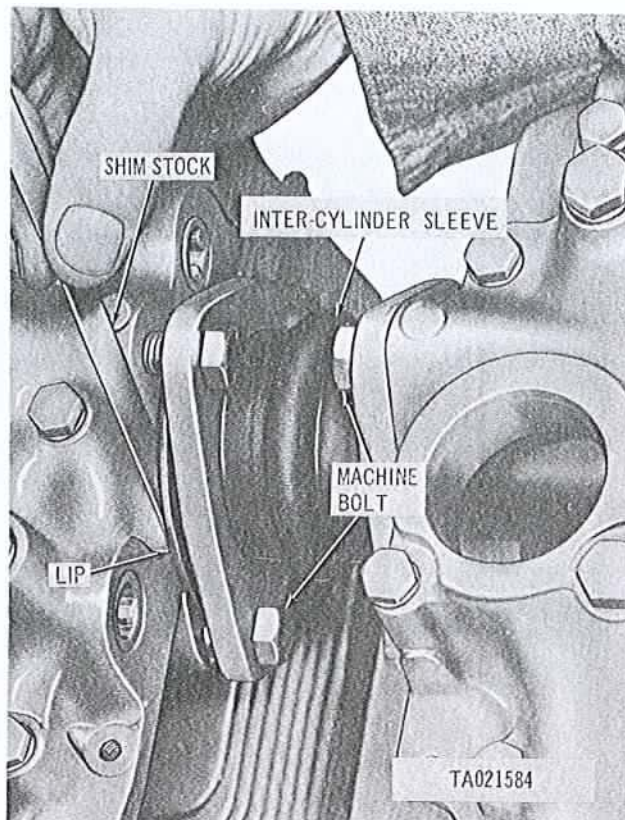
Installing camshaft intercylinder hose flange bolts.
